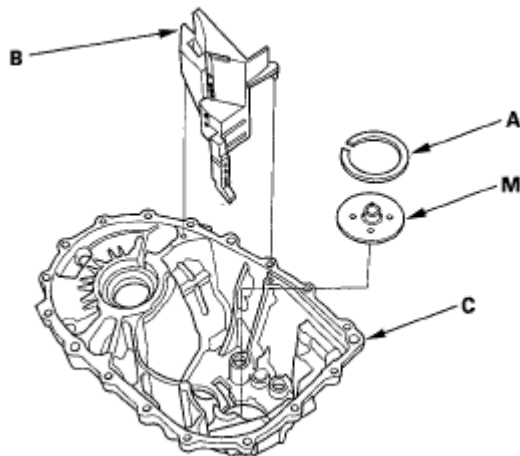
Identifying Shim, Transmission Housing And Oil Gutter Plate
